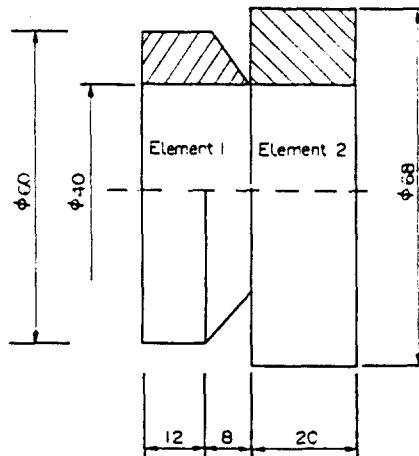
Dimensions of two cylindrical elements subjected to welding.
